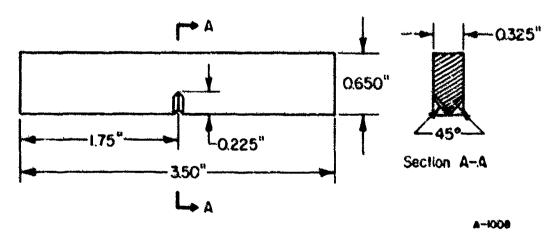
SLOW BEND FRACTURE TOUGHNESS SPECIMEN
